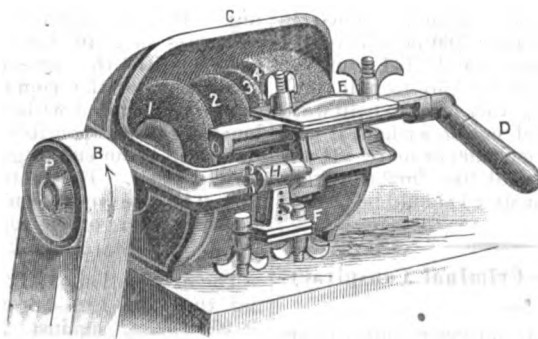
No. 4 Clipper Grinder, with Attachment for Grinding Gouges.
